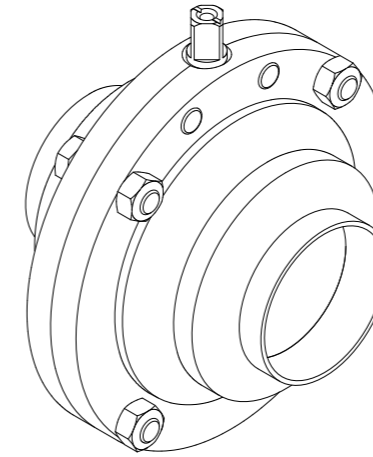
Disassembly / Assembly of manual and pneumatic drive
